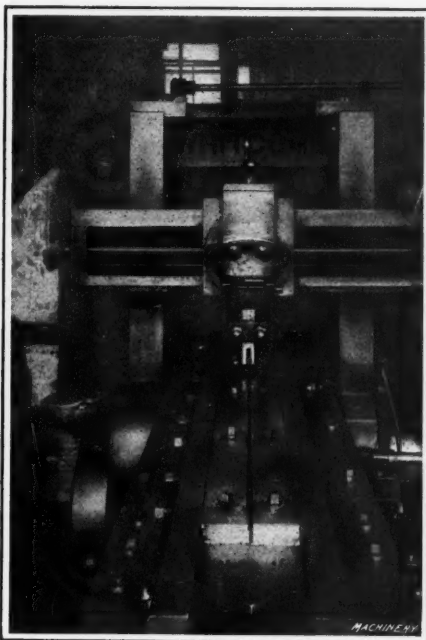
Rolling in Drill Shank Groove on Planer with Special Fixture
